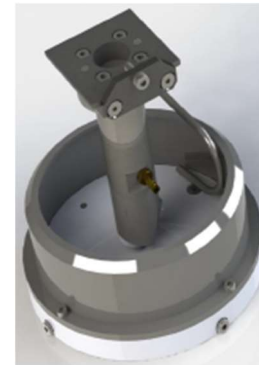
Test setup drilling friction: Holder for semispherical test specimens and oil bath with splash guard and suction pipe
